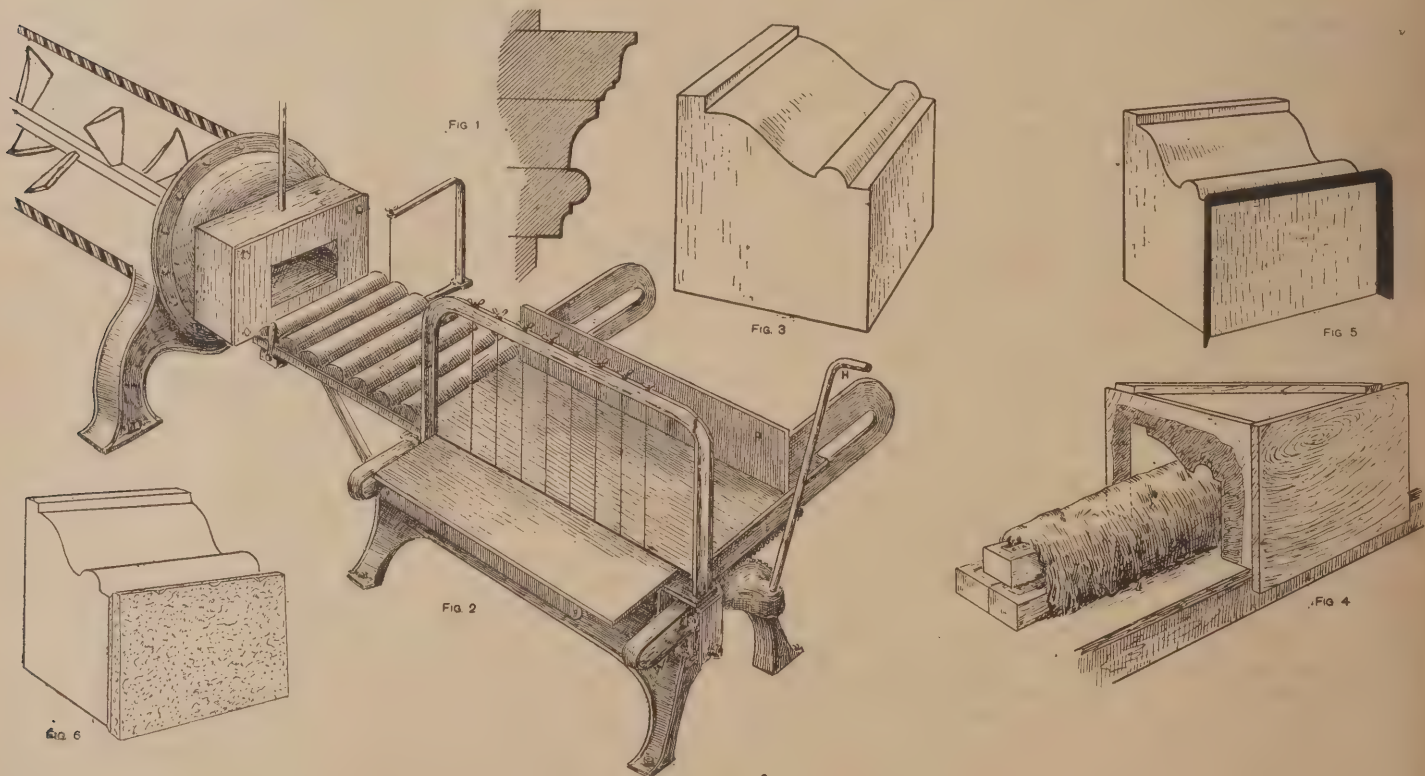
STRING COURSE OF MACHINE-MADE MOULDINGS. MOULDING TO BE MADE BY HAND.
